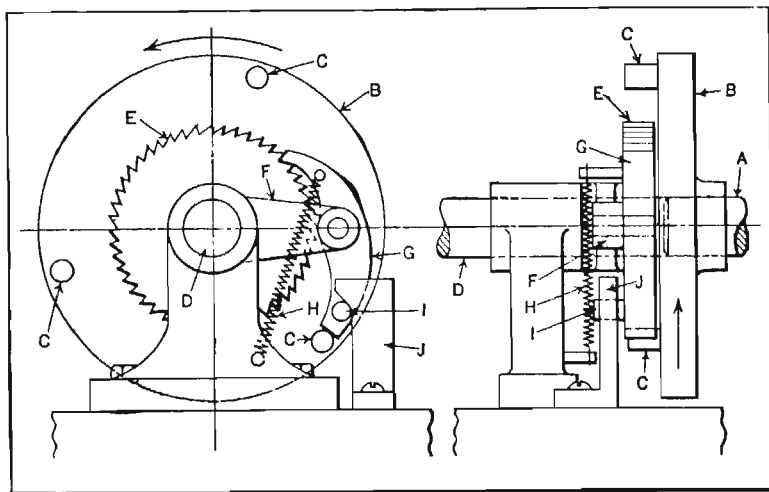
Intermittent Motion Drive Mechanism Used on Wire-forming Machine
